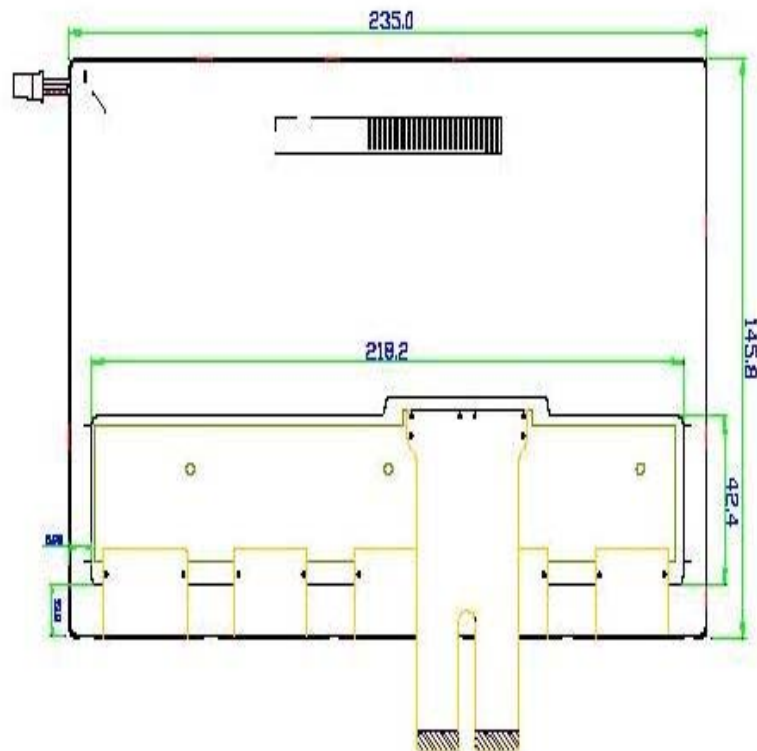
Outline dimension of TFT-LCD module (Rear Side)
